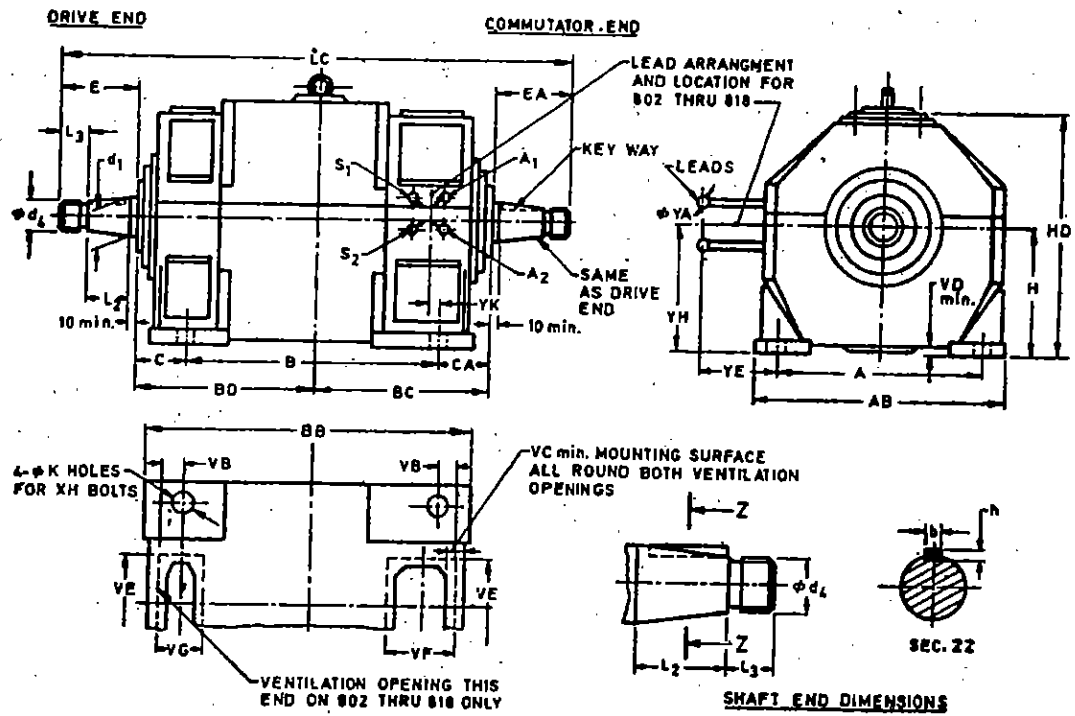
dc MILL/CRANE DUTY MOTORS (800 SERIES)
